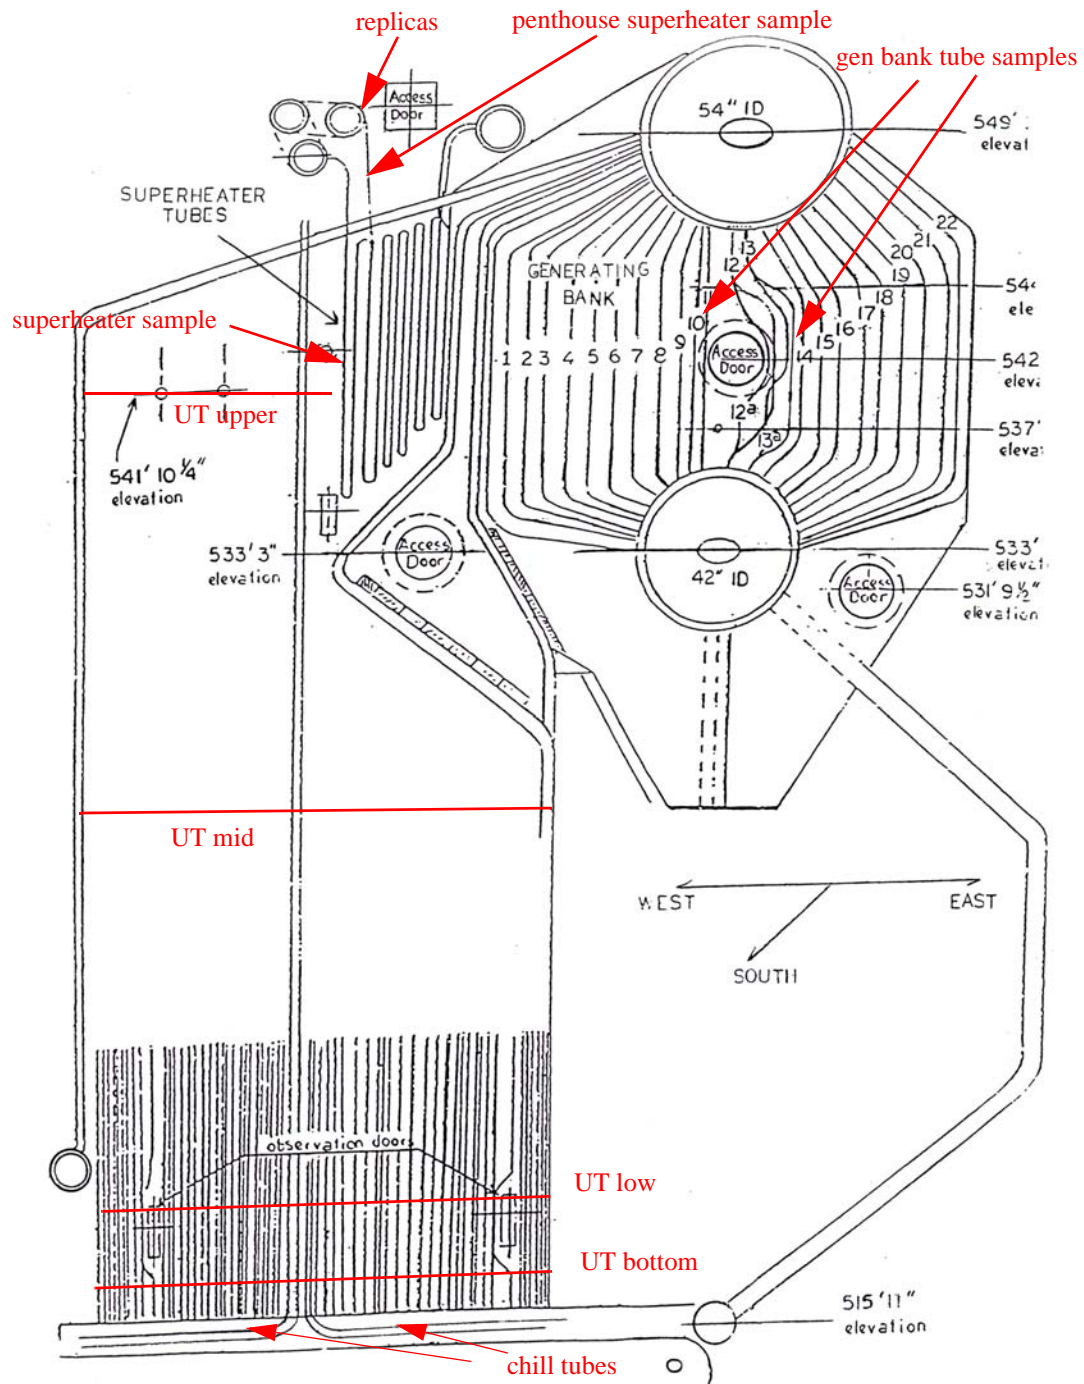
Sketch of the Riley boiler examined showing approximately locations of tube samples removed and testing performed.
